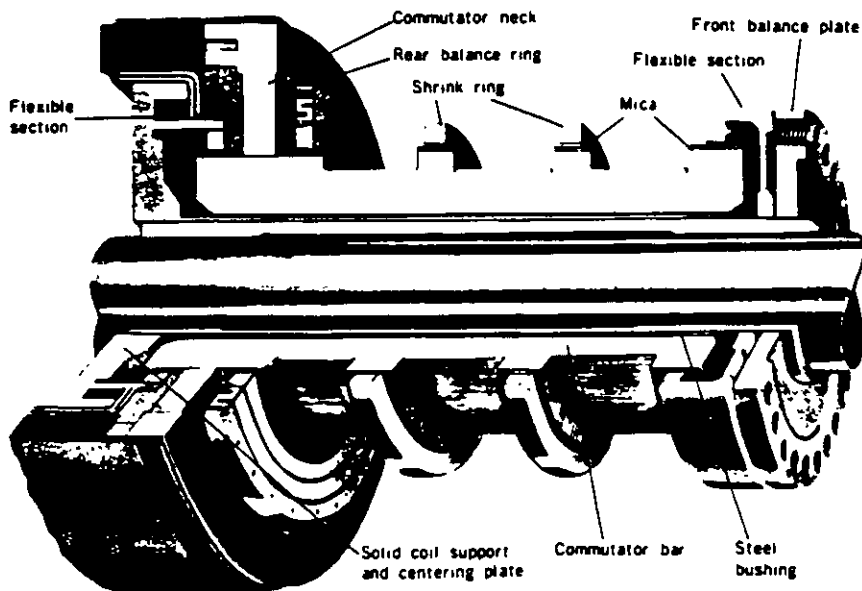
Shrink-ring type commutator for shaft driven direct-connected exciter
